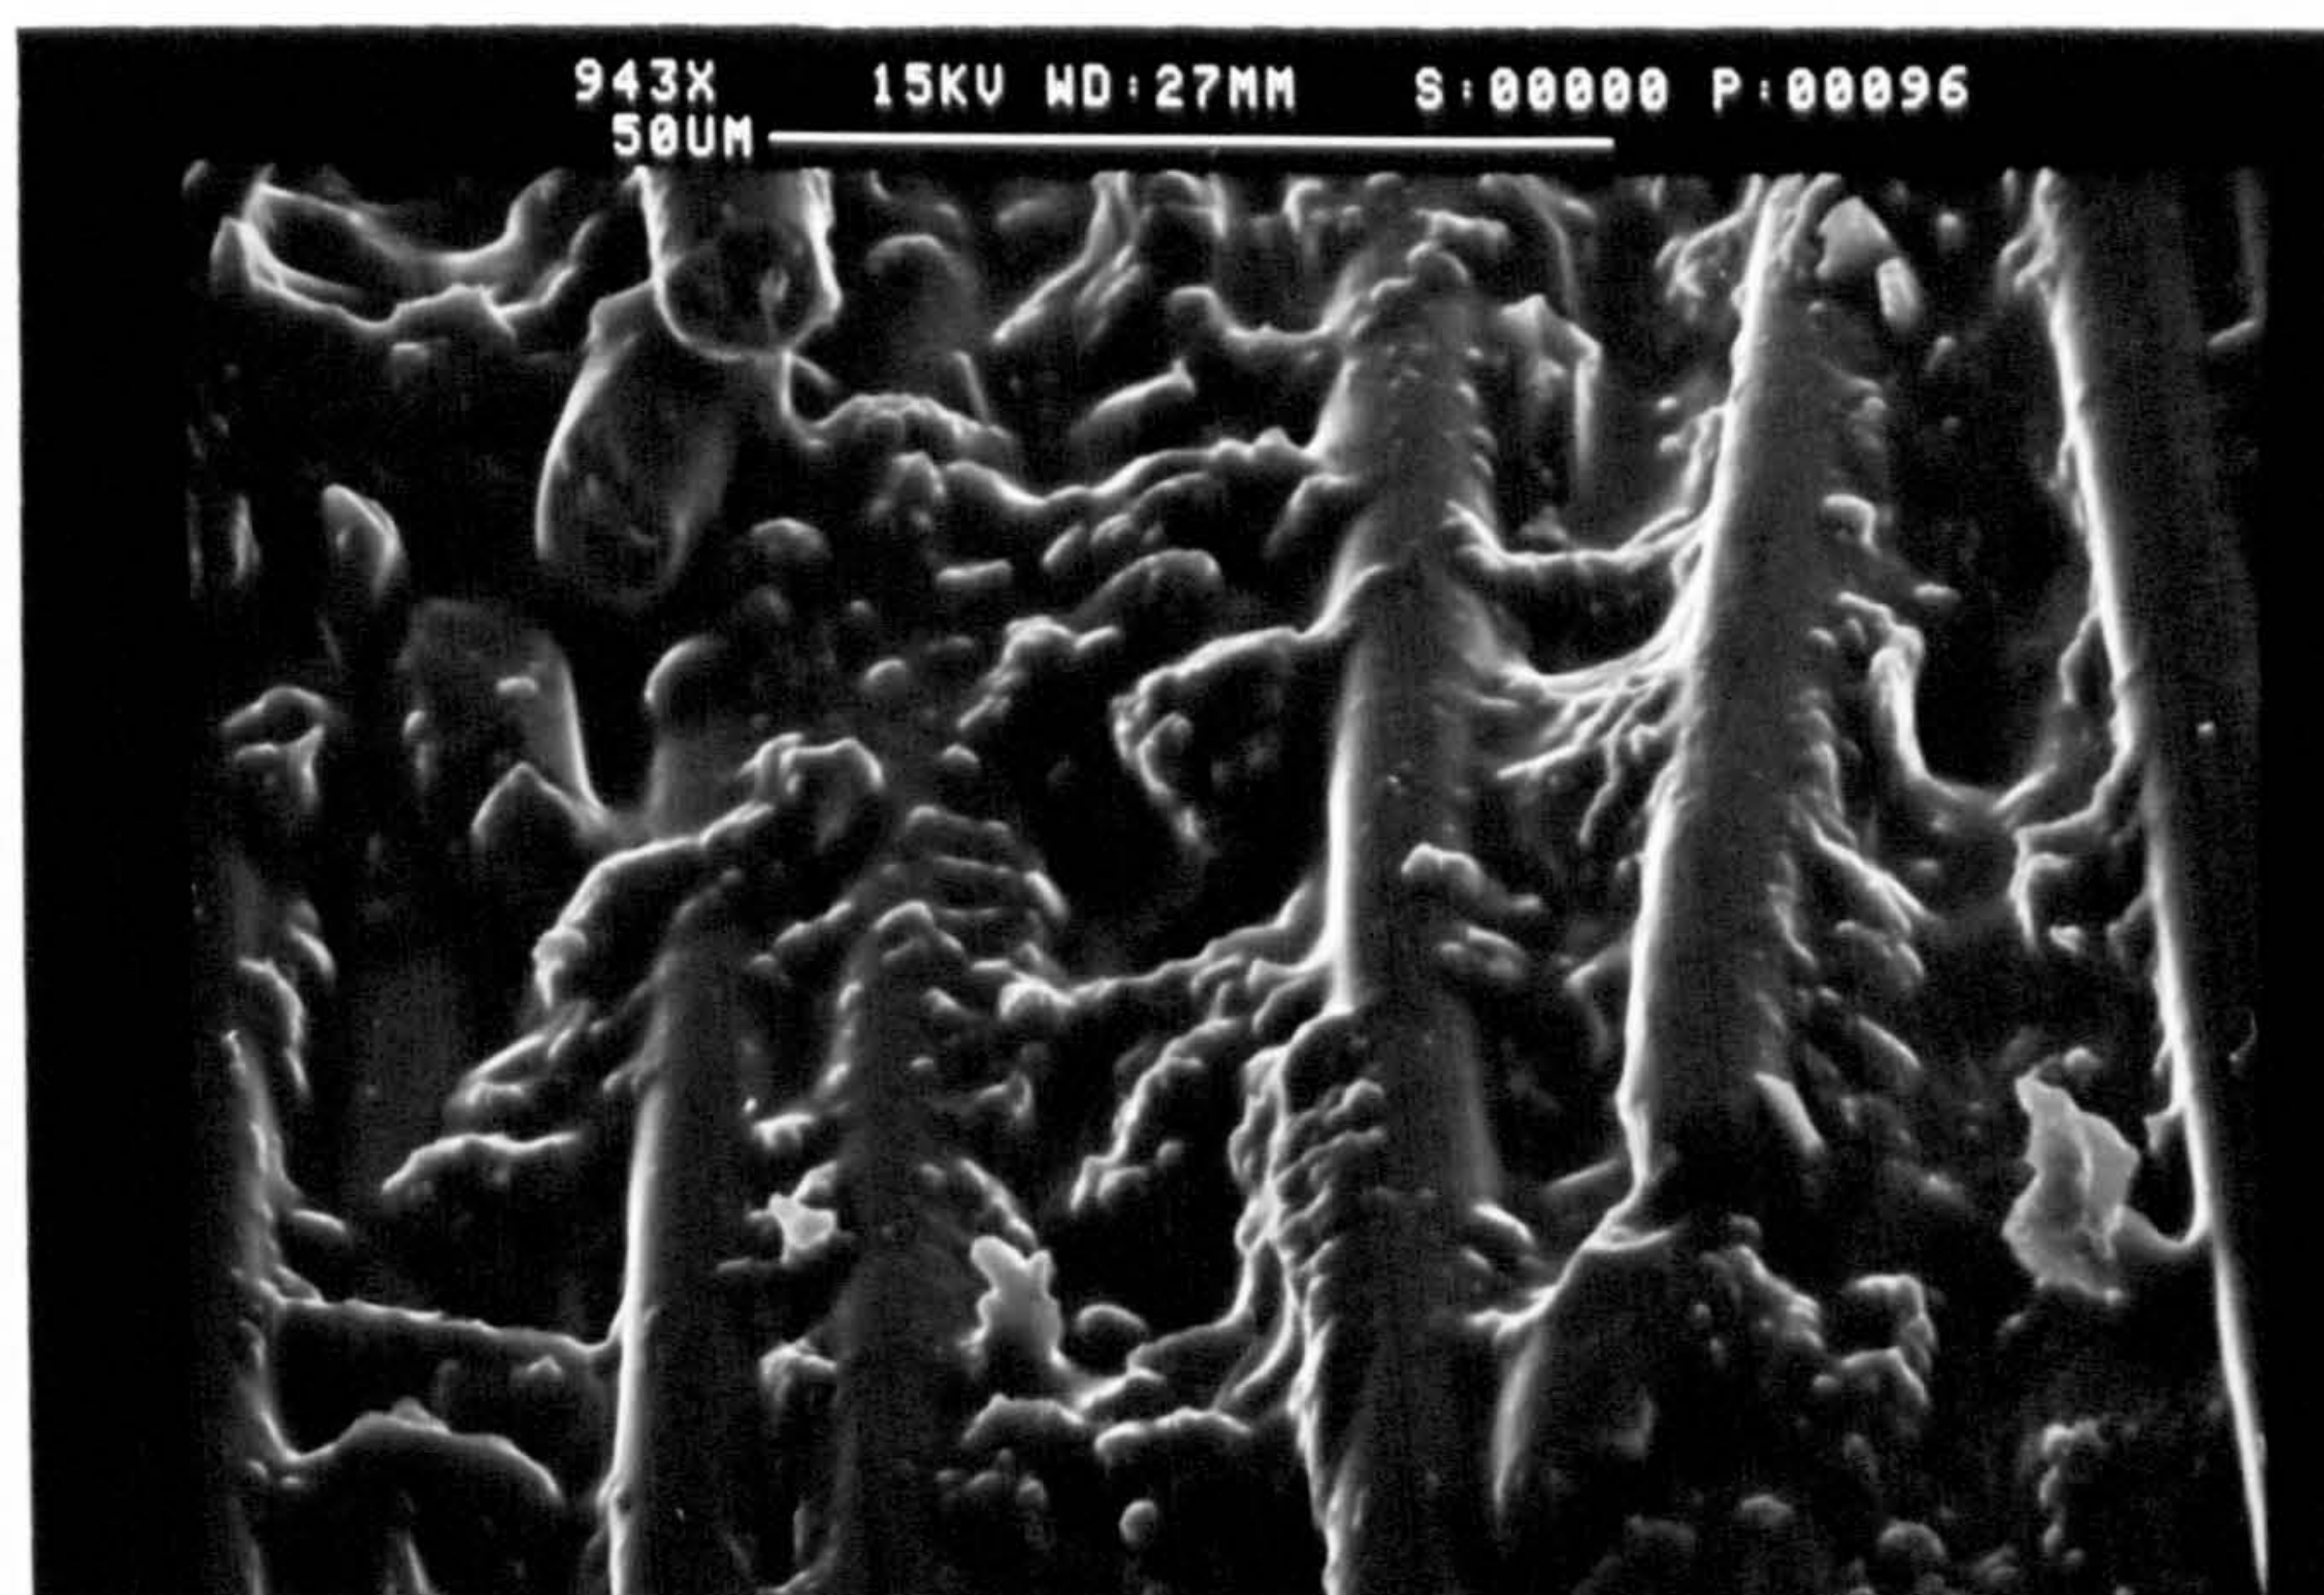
GFRP surface machined with worn HSS tool showing ductile nature of the resin. (Speed = 100 m/min, feed = 0.125 mm/rev)
